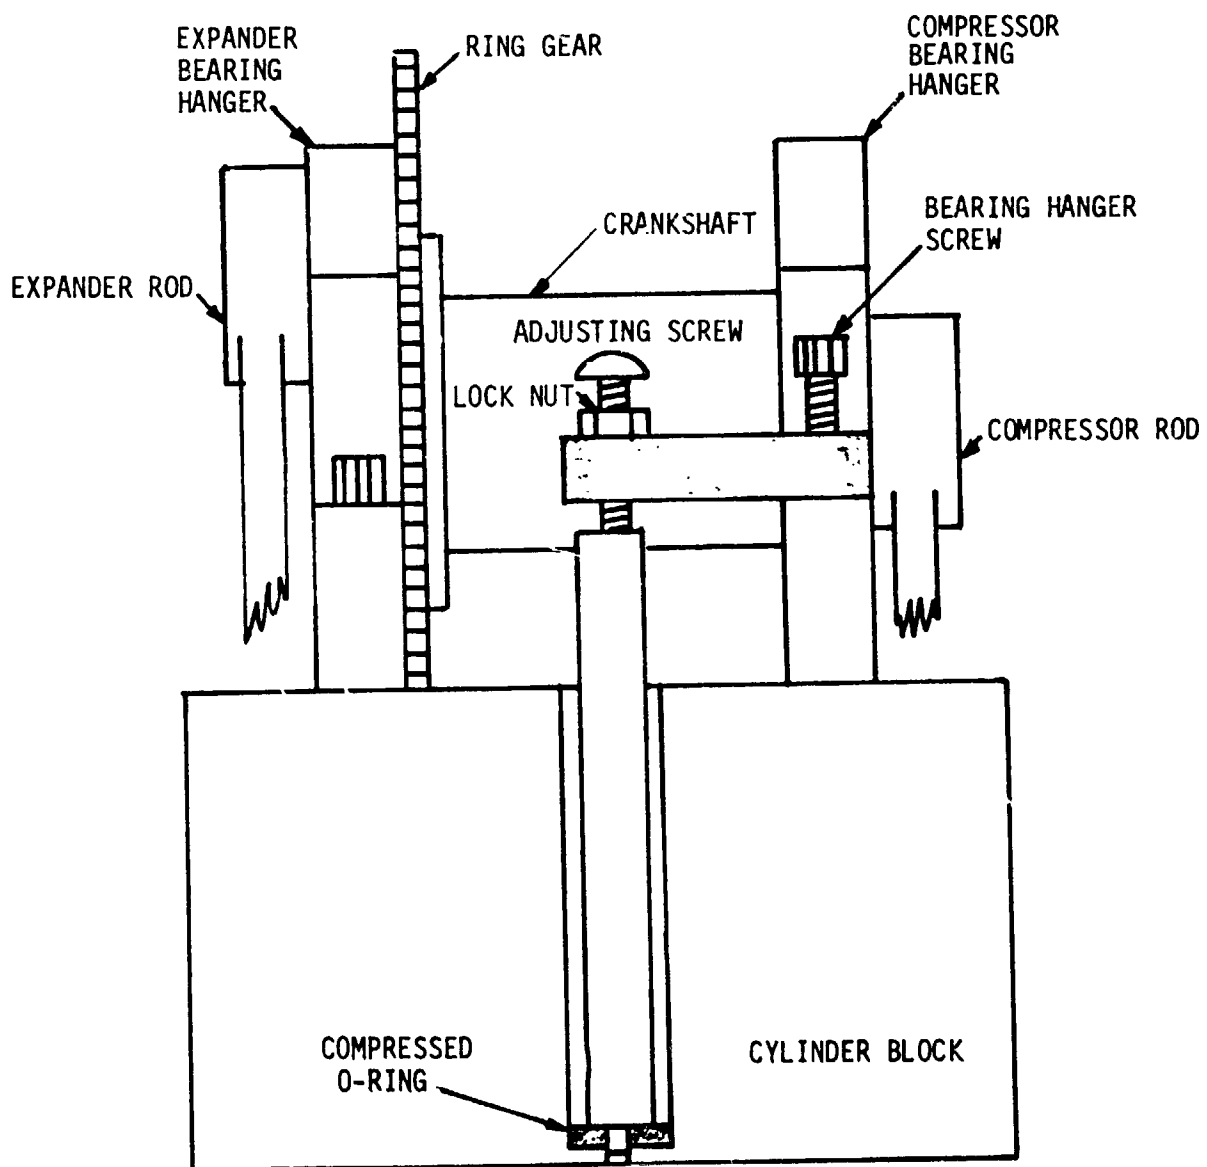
S192 Cooler Main Bearing Support (As Received)
